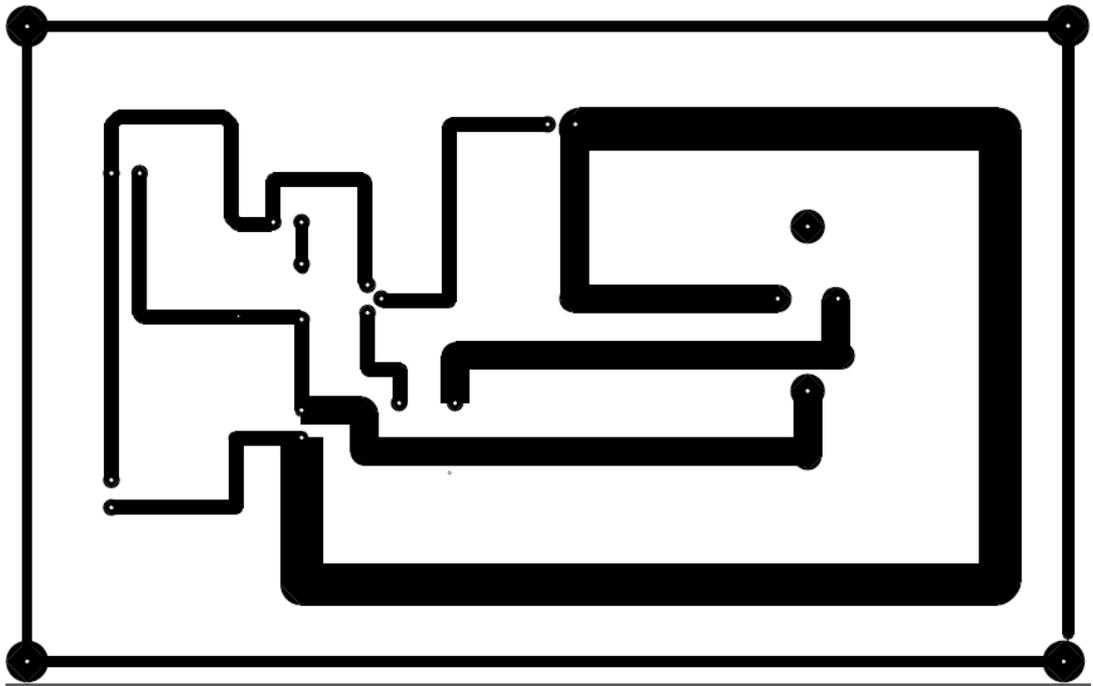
Schematic design on the Printed Circuit Board (PCB)
